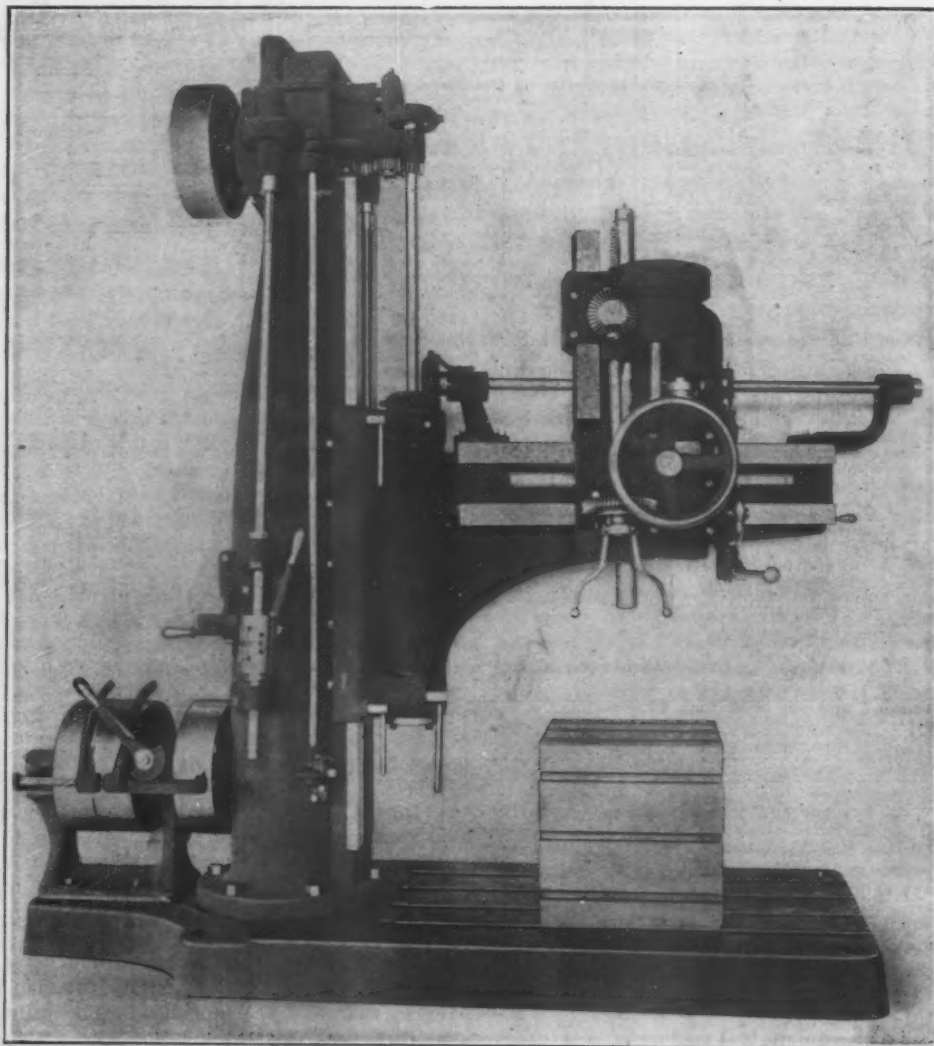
The Improved Triple-Gear Radial Drill Built by the Western Machine Tool Works, Holland, Mich.
